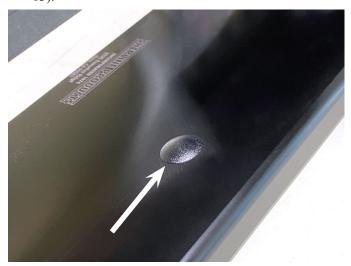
The white arrow is pointing to the plastic button plug that covers the 1/2" access hole in the lathe base.
